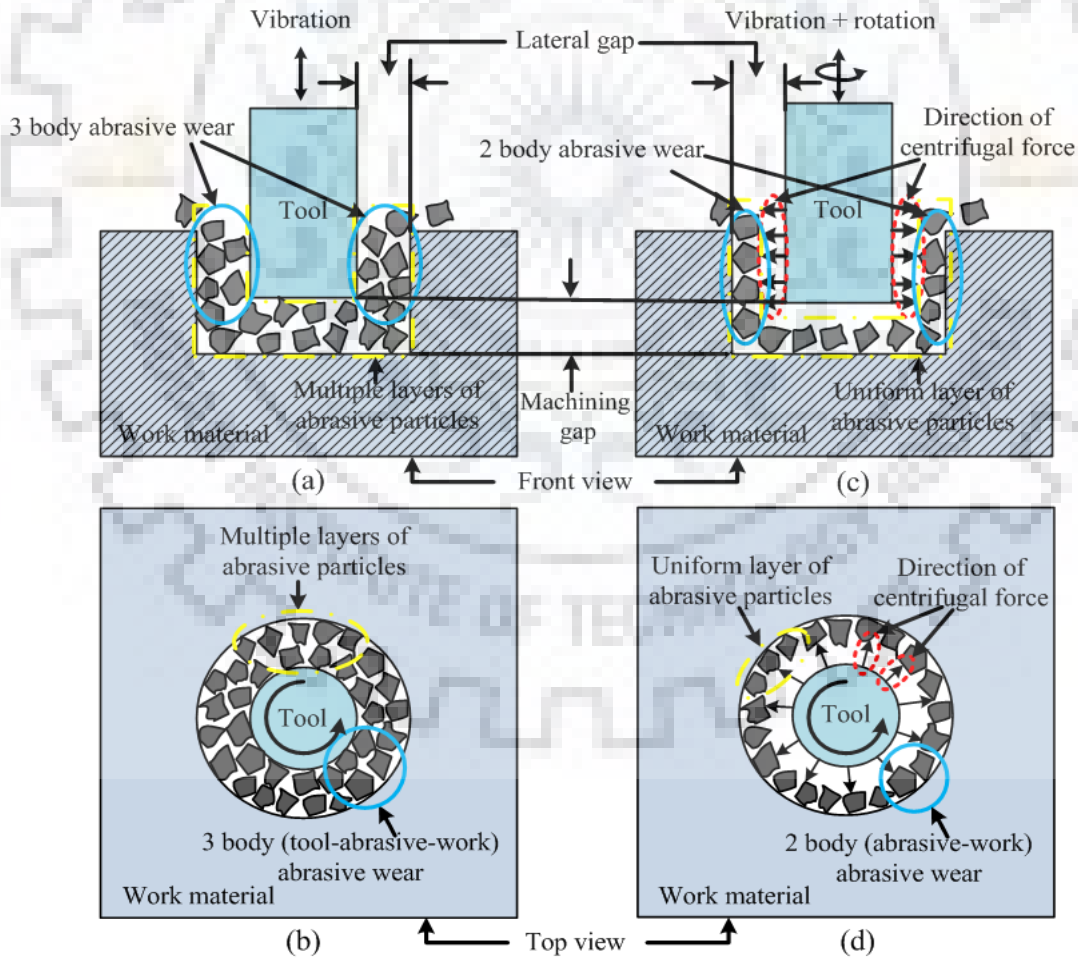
Schematic representation showing movement of abrasives in the machining zone
